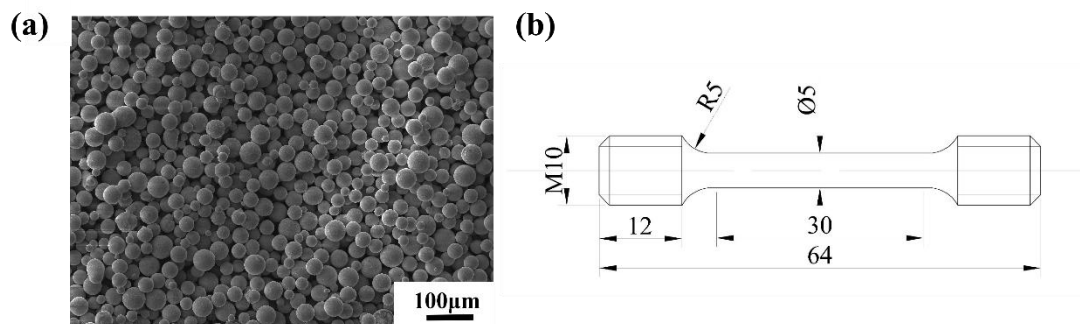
(a) Powder morphologies; (b) dimensions of tensile test specimens.
